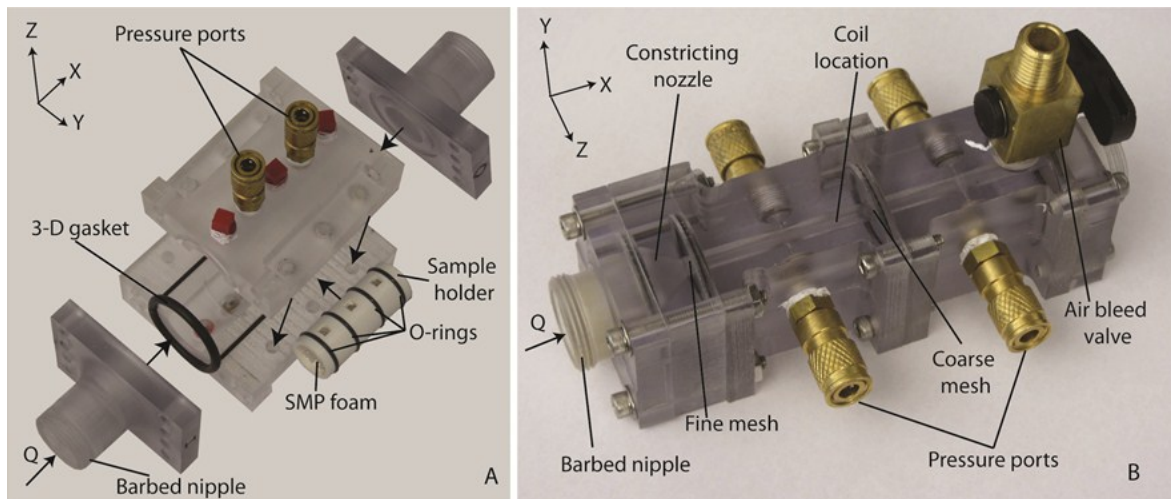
Exploded view of SMP foam chamber with arrows showing how pieces are assembled (A) and assembled MEC chamber (B).
